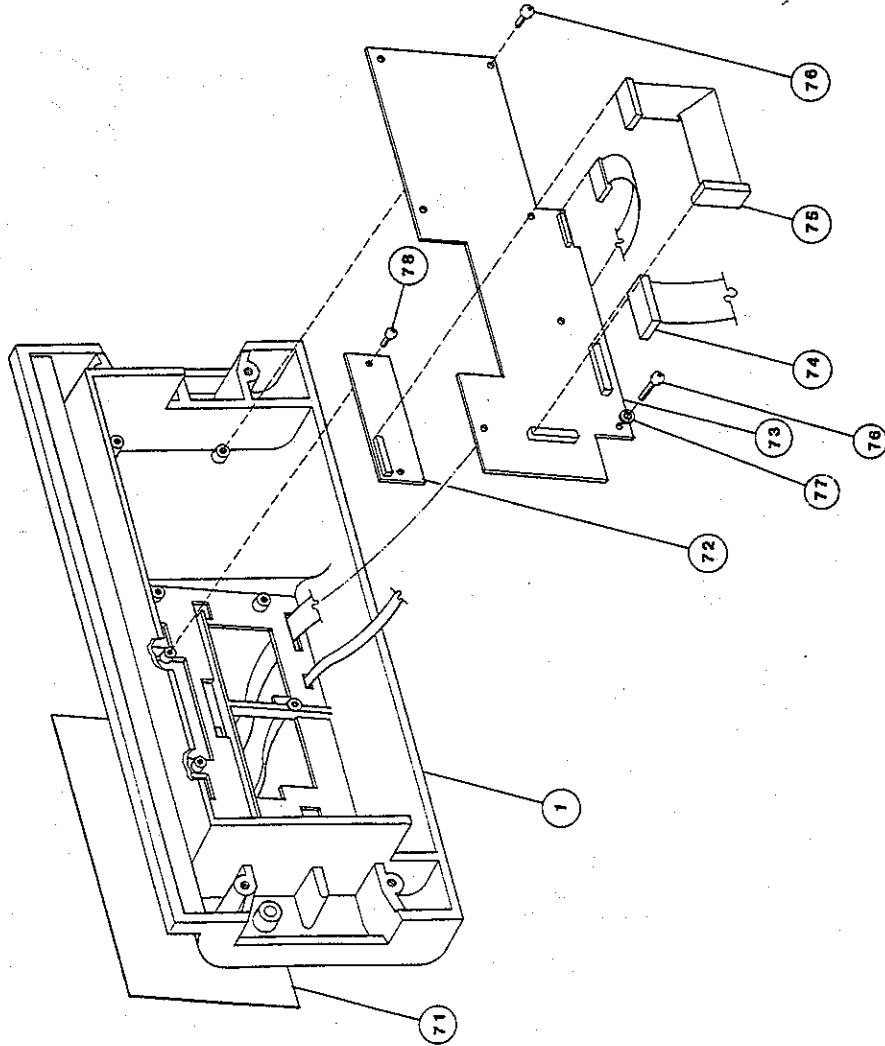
PARTS LOCATION DIAGRAM, CONTROLLER ASSEMBLY
